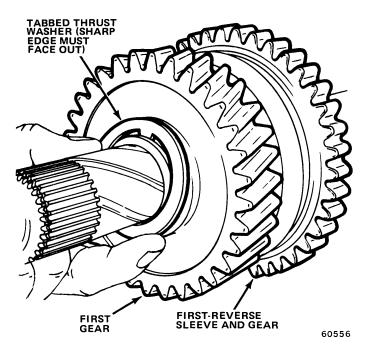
Installing First Gear Thrust Washer on Main Shaft
